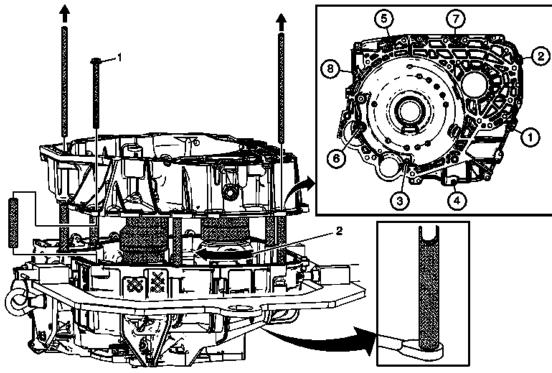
Identifying Differential Thrust Washer Gage Courtesy of GENERAL MOTORS COMPANY Differential Thrust Washer Gauge Installation
